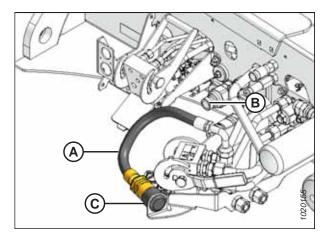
Knife Drive Hose on Rotary Disc and Draper Ready Windrower
